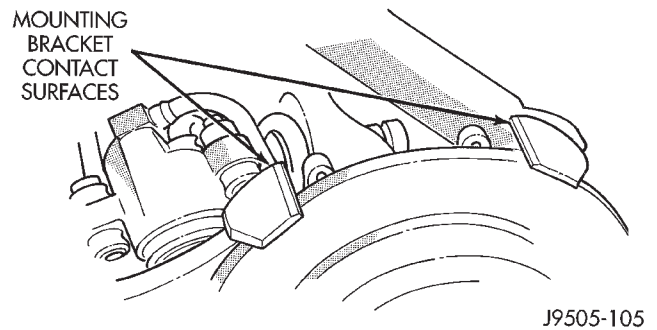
Brakeshoe Contact Surfaces Of Mounting Bracket
